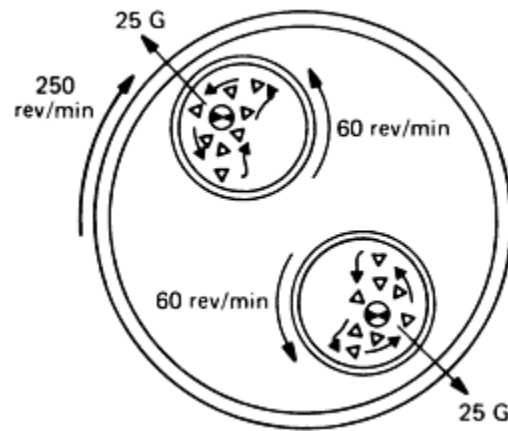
Action of turret and drums within a centrifugal barrel finishing machine
